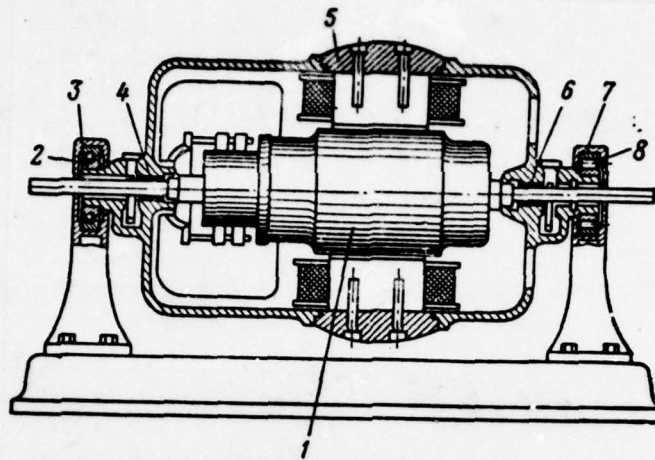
Bob electric motor. 1 - anchor, 2, 8 - the bearings of stator, 3, 7 - strut, 4, 6 - spin bearings, 5 - stator.
